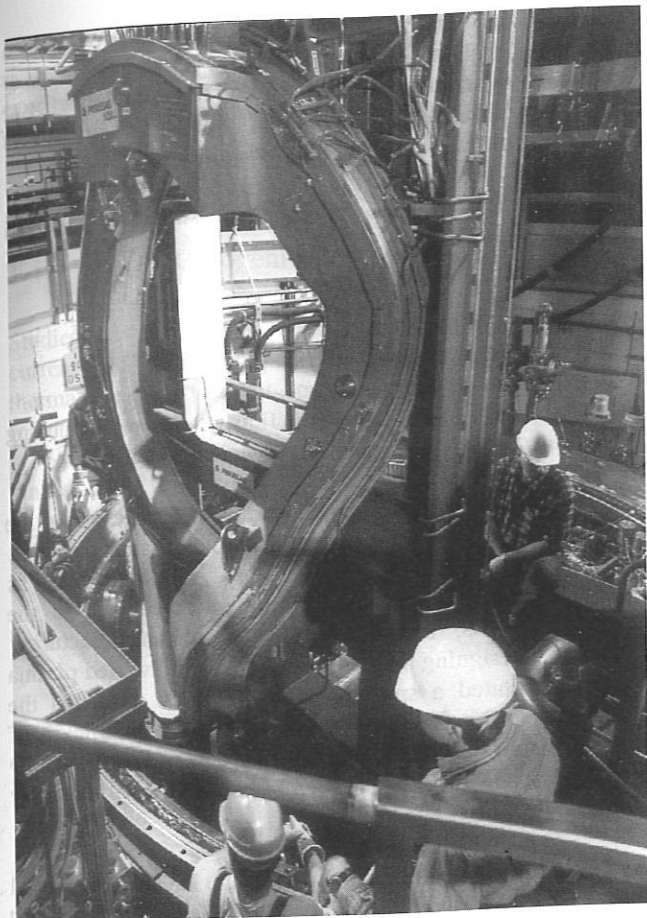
Assembly of the DEMO coil and the intermediate frame in the TOSKA cryostat.
